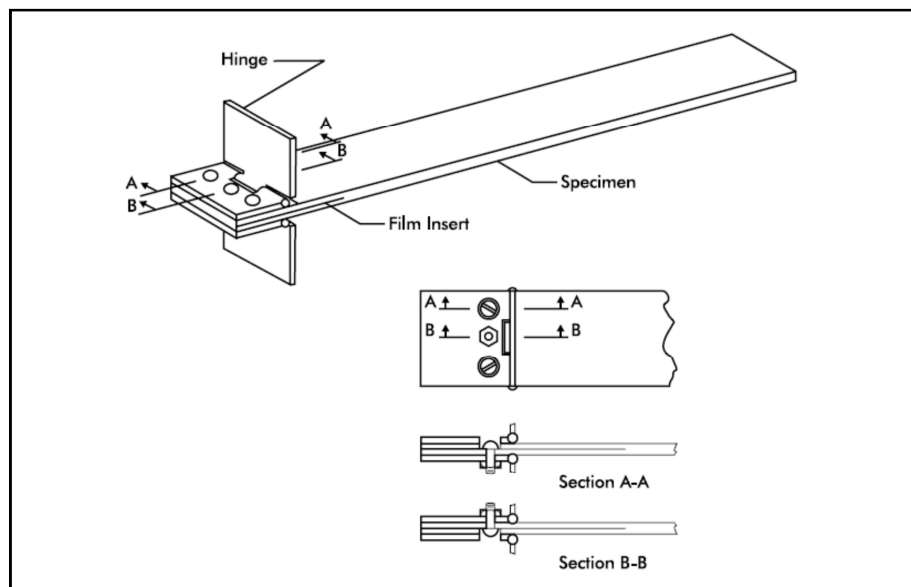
DCB specimen with hinges attached by bolting [52]
